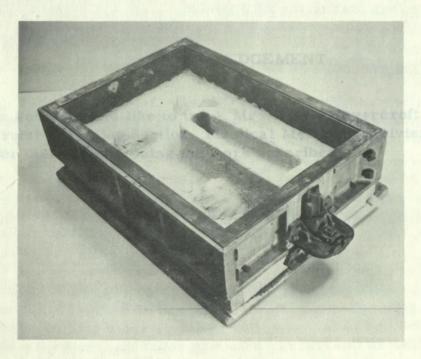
CSA mould showing trough to allow the mould to be poured from one end.
